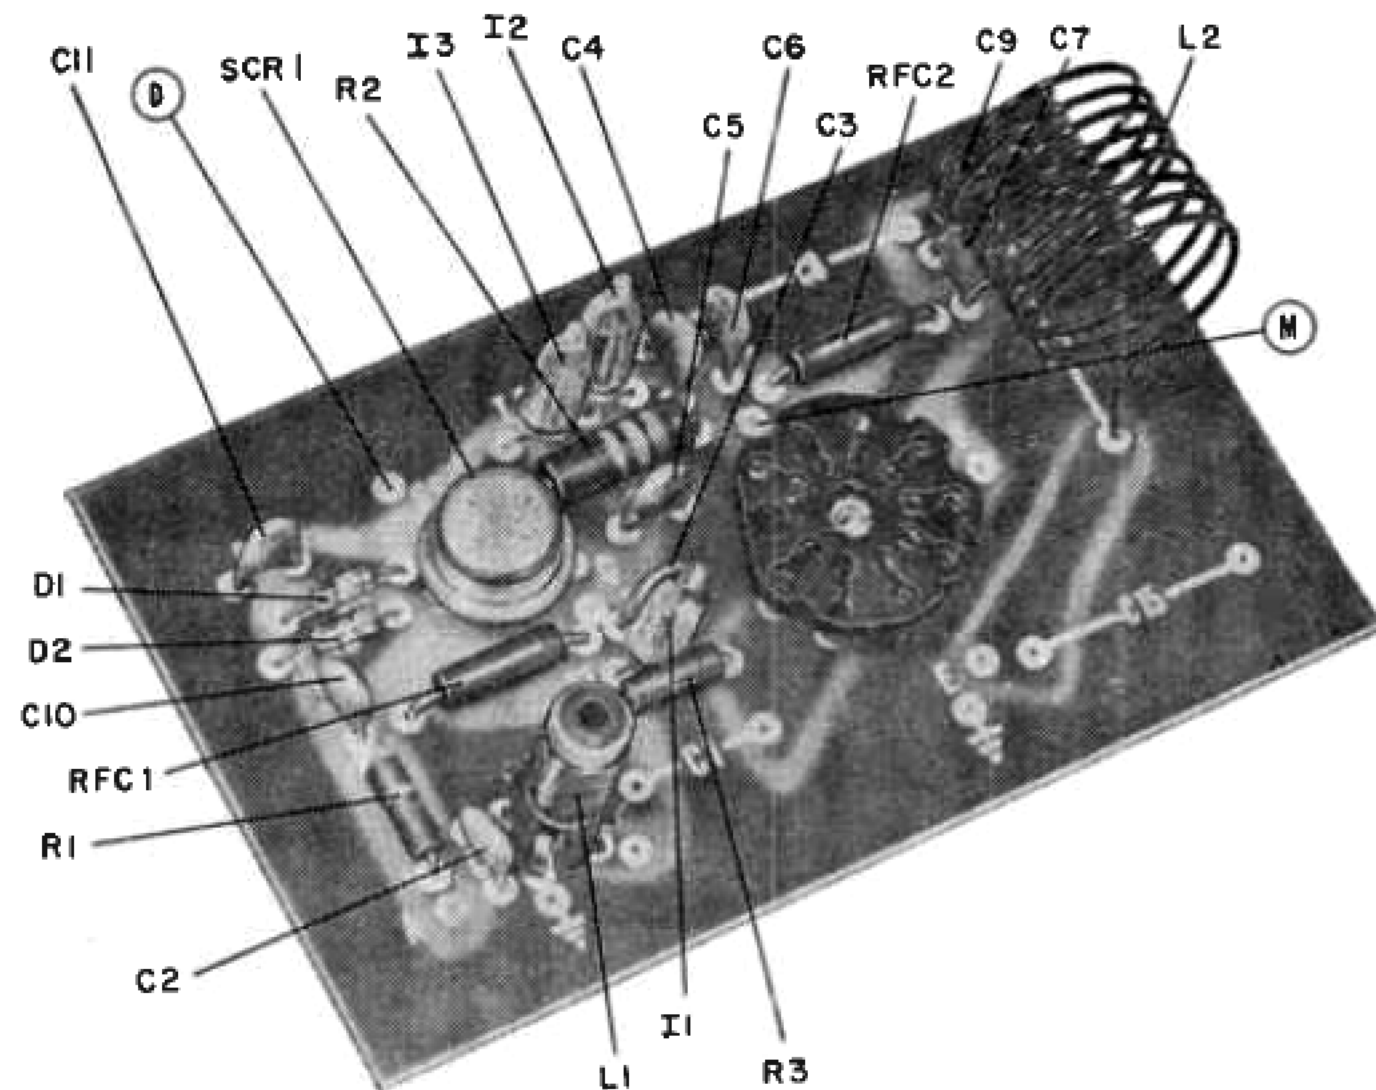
Except for the necessary inter-unit wiring, the printed circuit board must be fully assembled as shown here before it is installed on the chassis.
